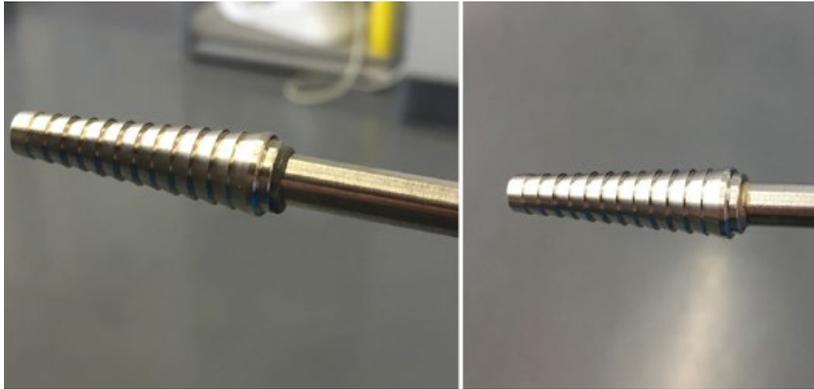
An assembly being joined with brazing paste. On the left is the assembled part with the dark grey paste applied at a junction between the two parts. On the right is the brazed part showing the braze fillet joining the two parts [Courtesy Prince & Izant, USA]
